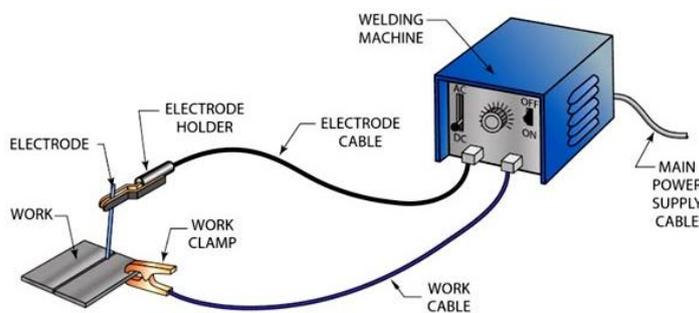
Shield metal arc welding equipment (electrical exam, 2018).
